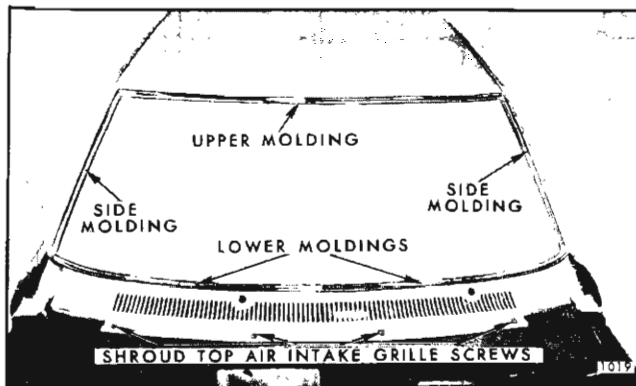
C14—Shroud Top Air Intake Grille and Windshield Reveal Moldings
